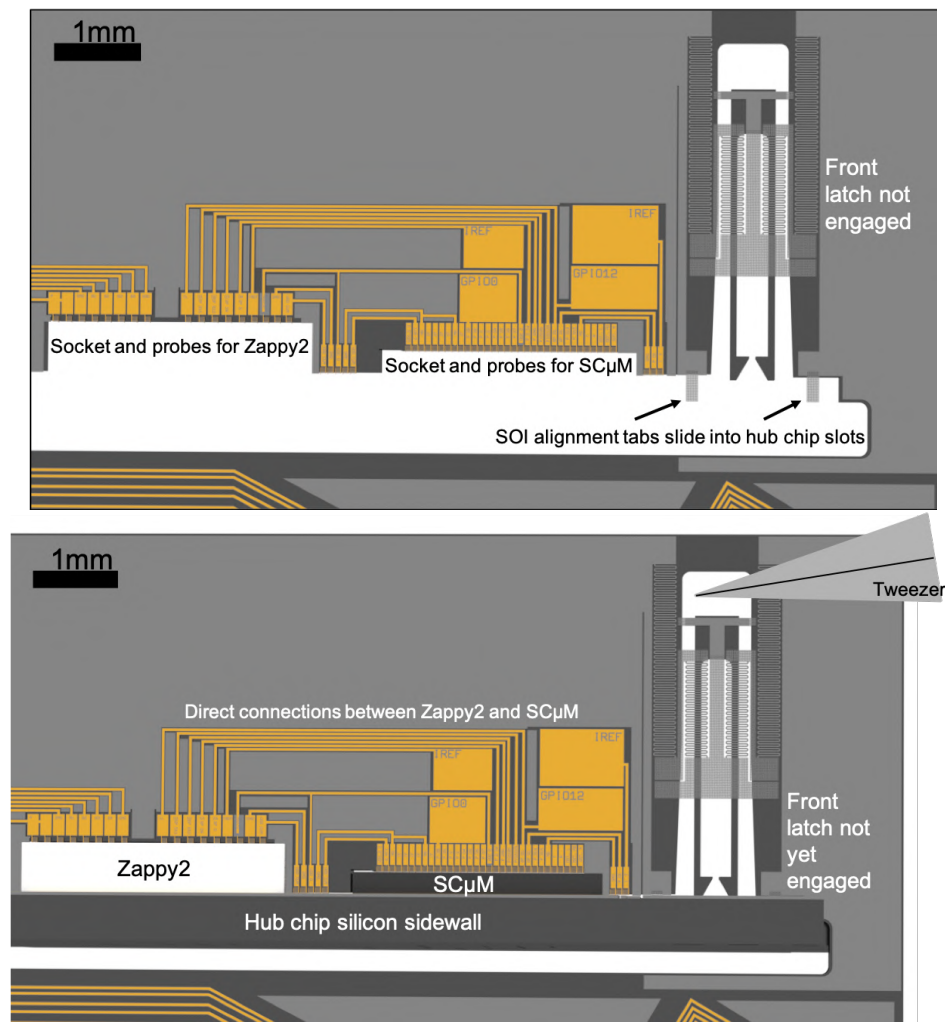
3D Model: A top down view of the sockets, probes and assembly latches designed into the right leg. Top: before assembly with the hub chip. Bottom: after assembly with the hub chip, SC $\mu$ M and Zappy2.
